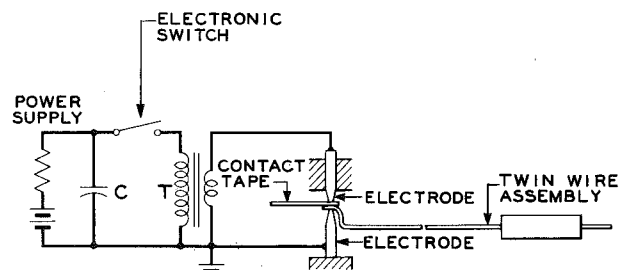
Welding Diagram - Twin Contacts
